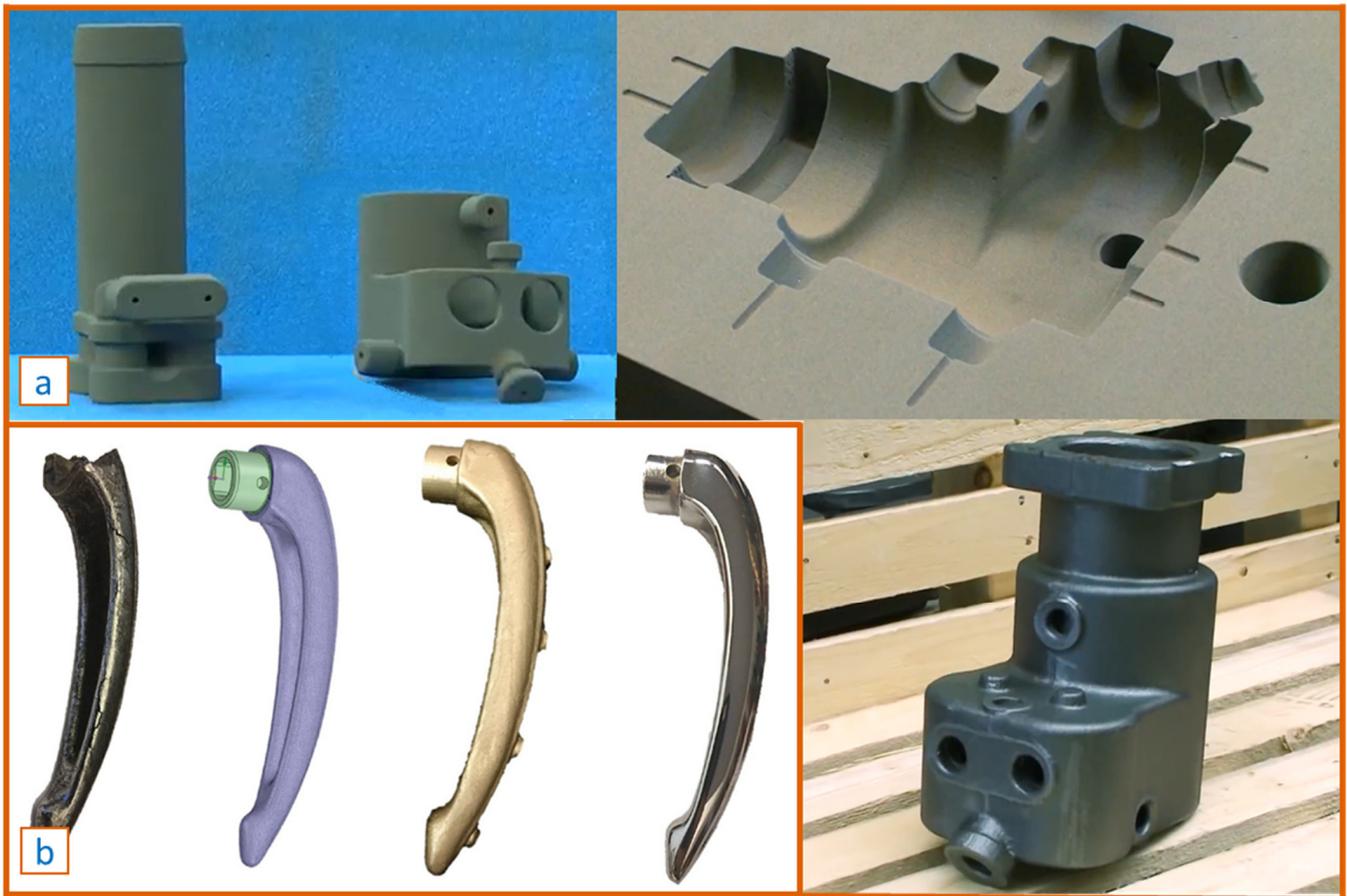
Polymer spare-part reconstruction based on indirect AM processes: (a) Sand mould and cores for casting a 1912 one-cylinder car engine (photo credits: 3Dealise). (b) Investment cast door handle (photo credits: Rare Parts Club, a division of Freshmade 3D).
